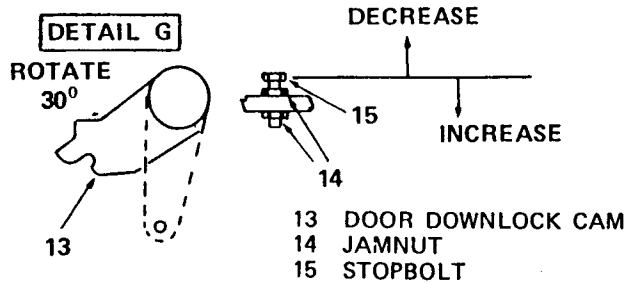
B. Main Landing Gear Door Adjustment (Sheet 5)
